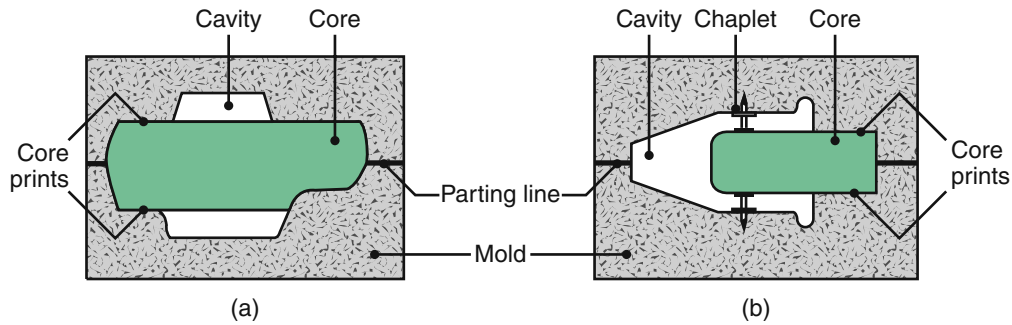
Examples of sand cores, showing core prints and chaplets to support the cores.
